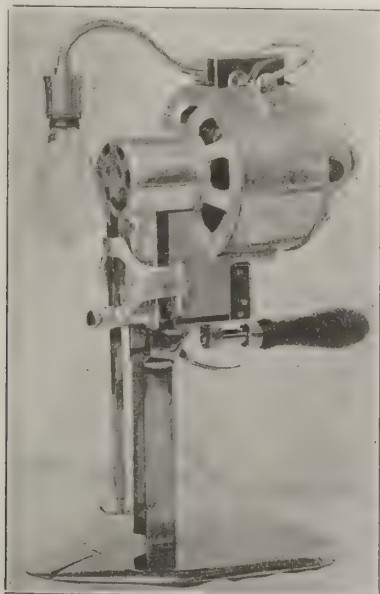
SMALL MOTOR OPERATING CLOTH-CUTTING MACHINE.
